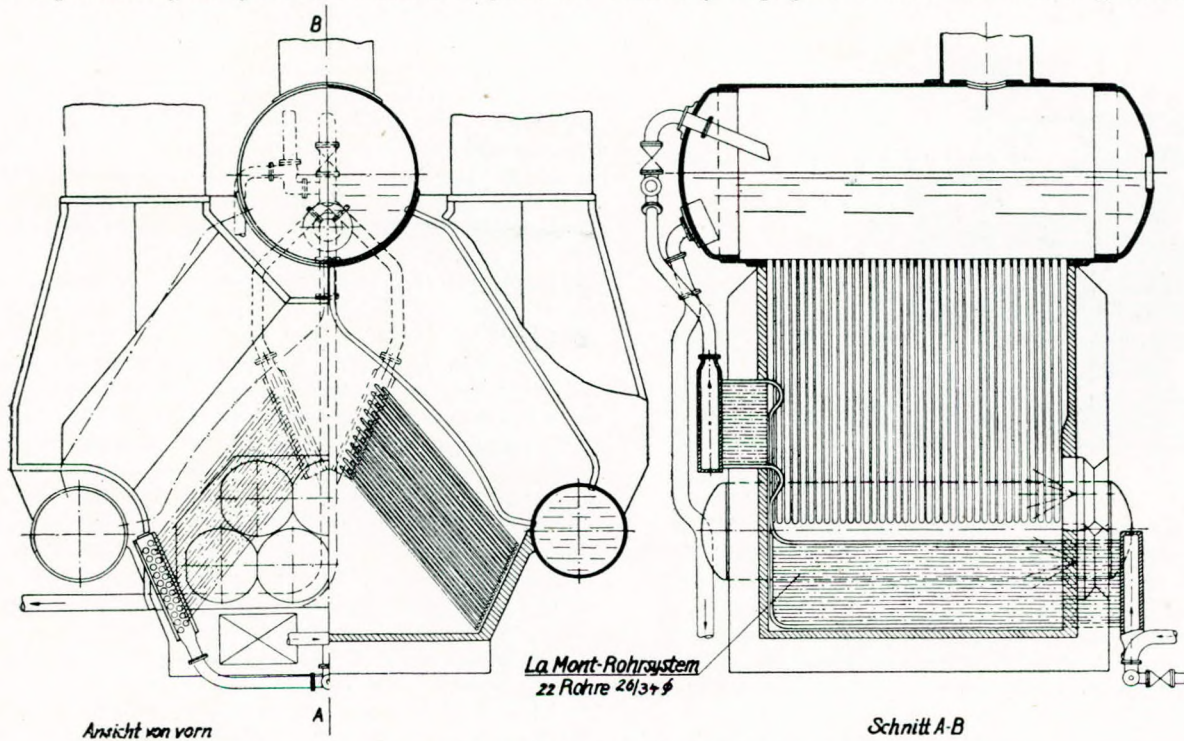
La Mont water walls installed in a watertube marine boiler.
